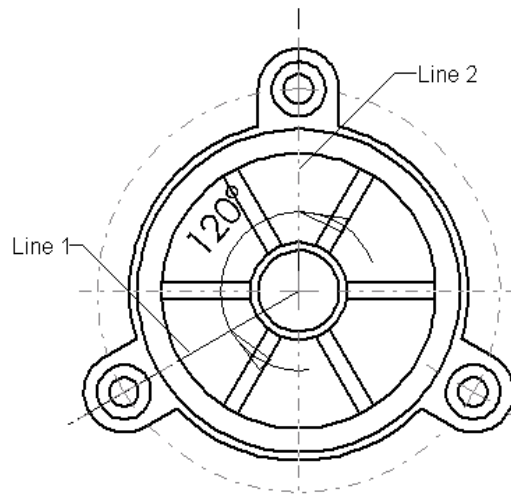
Sketch to be used as section sketch for the aligned section view
